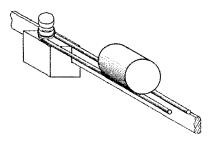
Detail drawing of the speed-control for bugs or semiautomatic keys.
